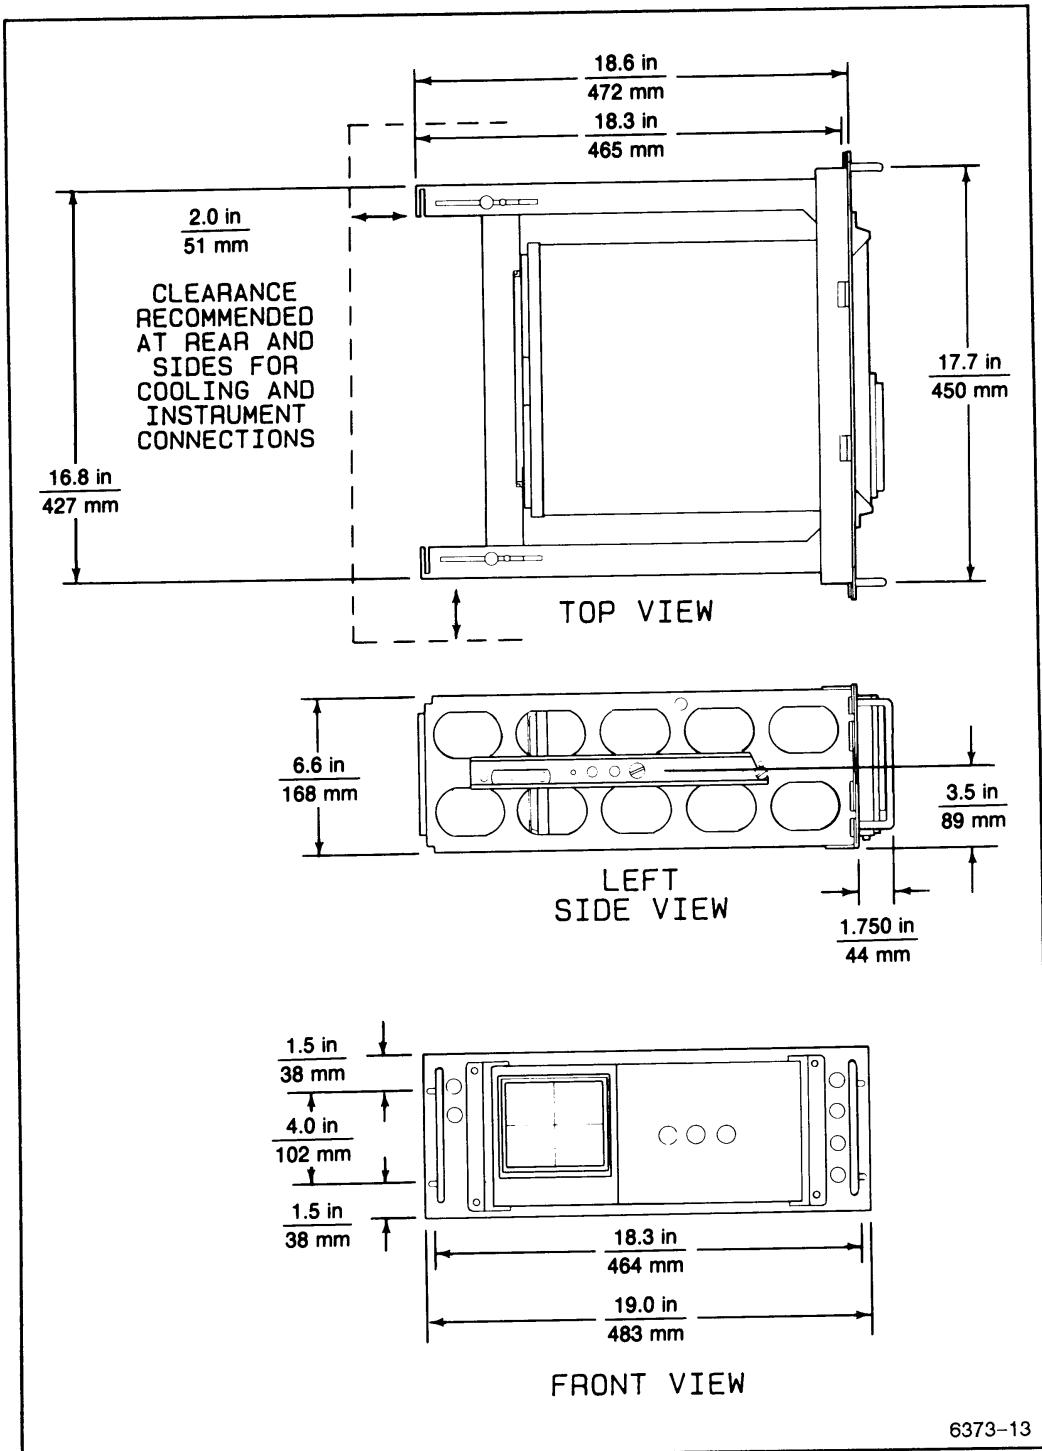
Dimensional drawing, rackmount cabinet (2240F1R).
